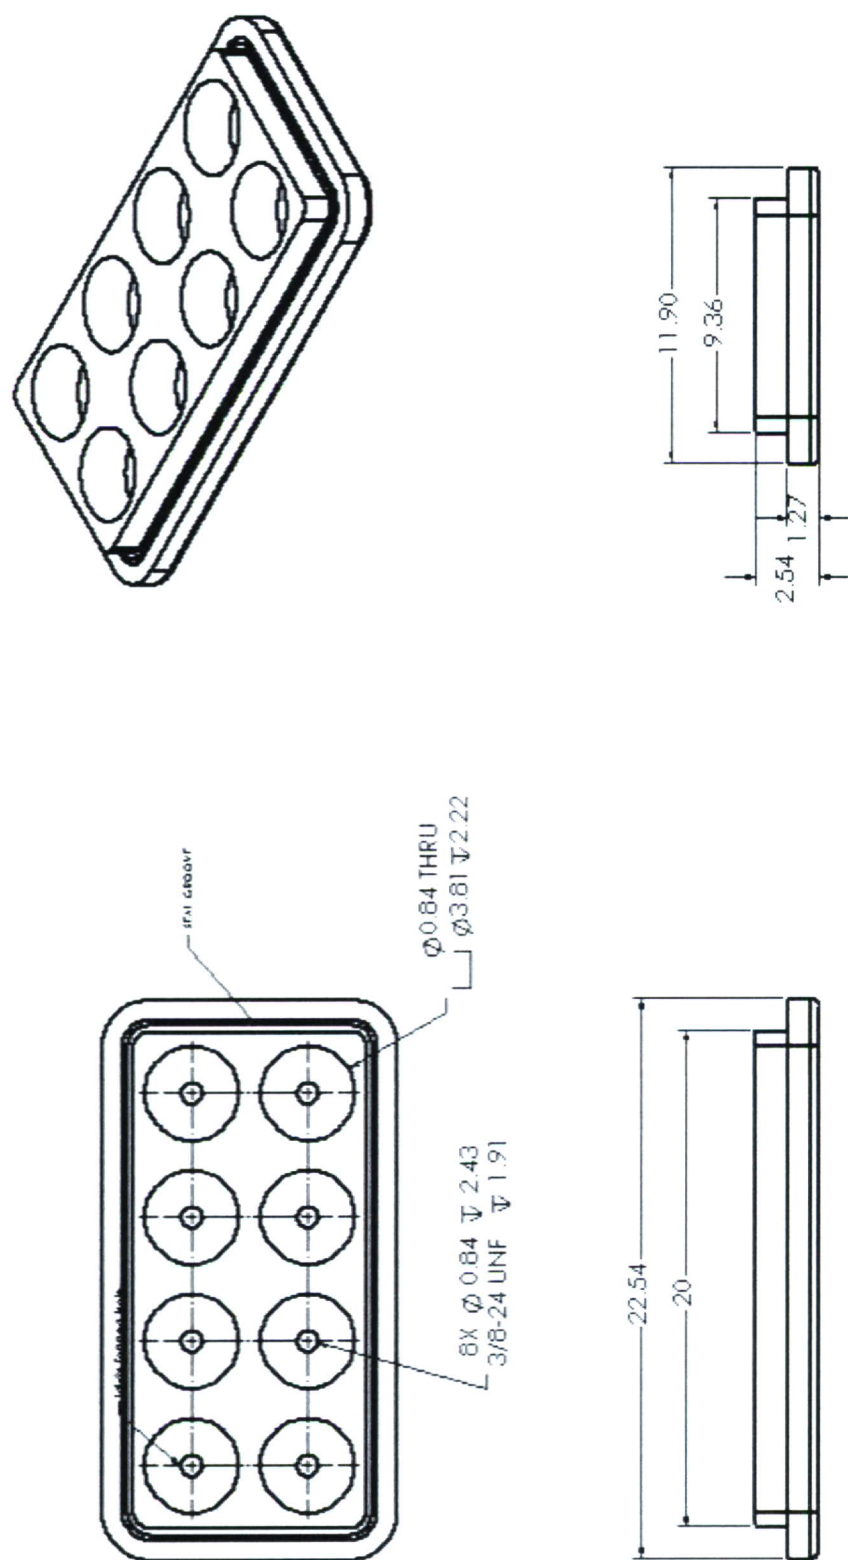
Sample Holder Tray and Test Section Floor Dimensions
